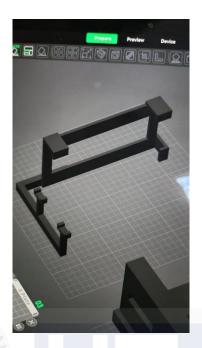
Setup For 3D Printing for Brake Calliper Holder
